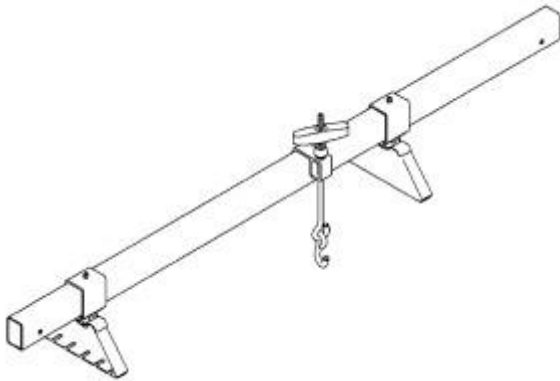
SUPPORT FIXTURE, ENGINE - 8534B
